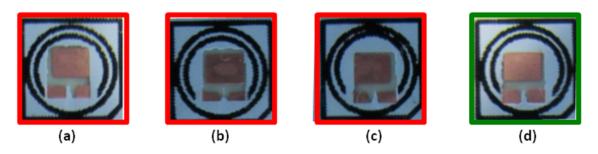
During PCB manufacturing poor positional control of the solder mask layer with respect to the top metallization layer can impact the actual pad dimensions on the PCB. The four pictures in this example were all taken from the same physical 4-up PCB. The anode and cathode dimensions for positions (a) – (c) on this PCB are smaller than originally designed. Only the pad dimensions for position (d) were in specification.
